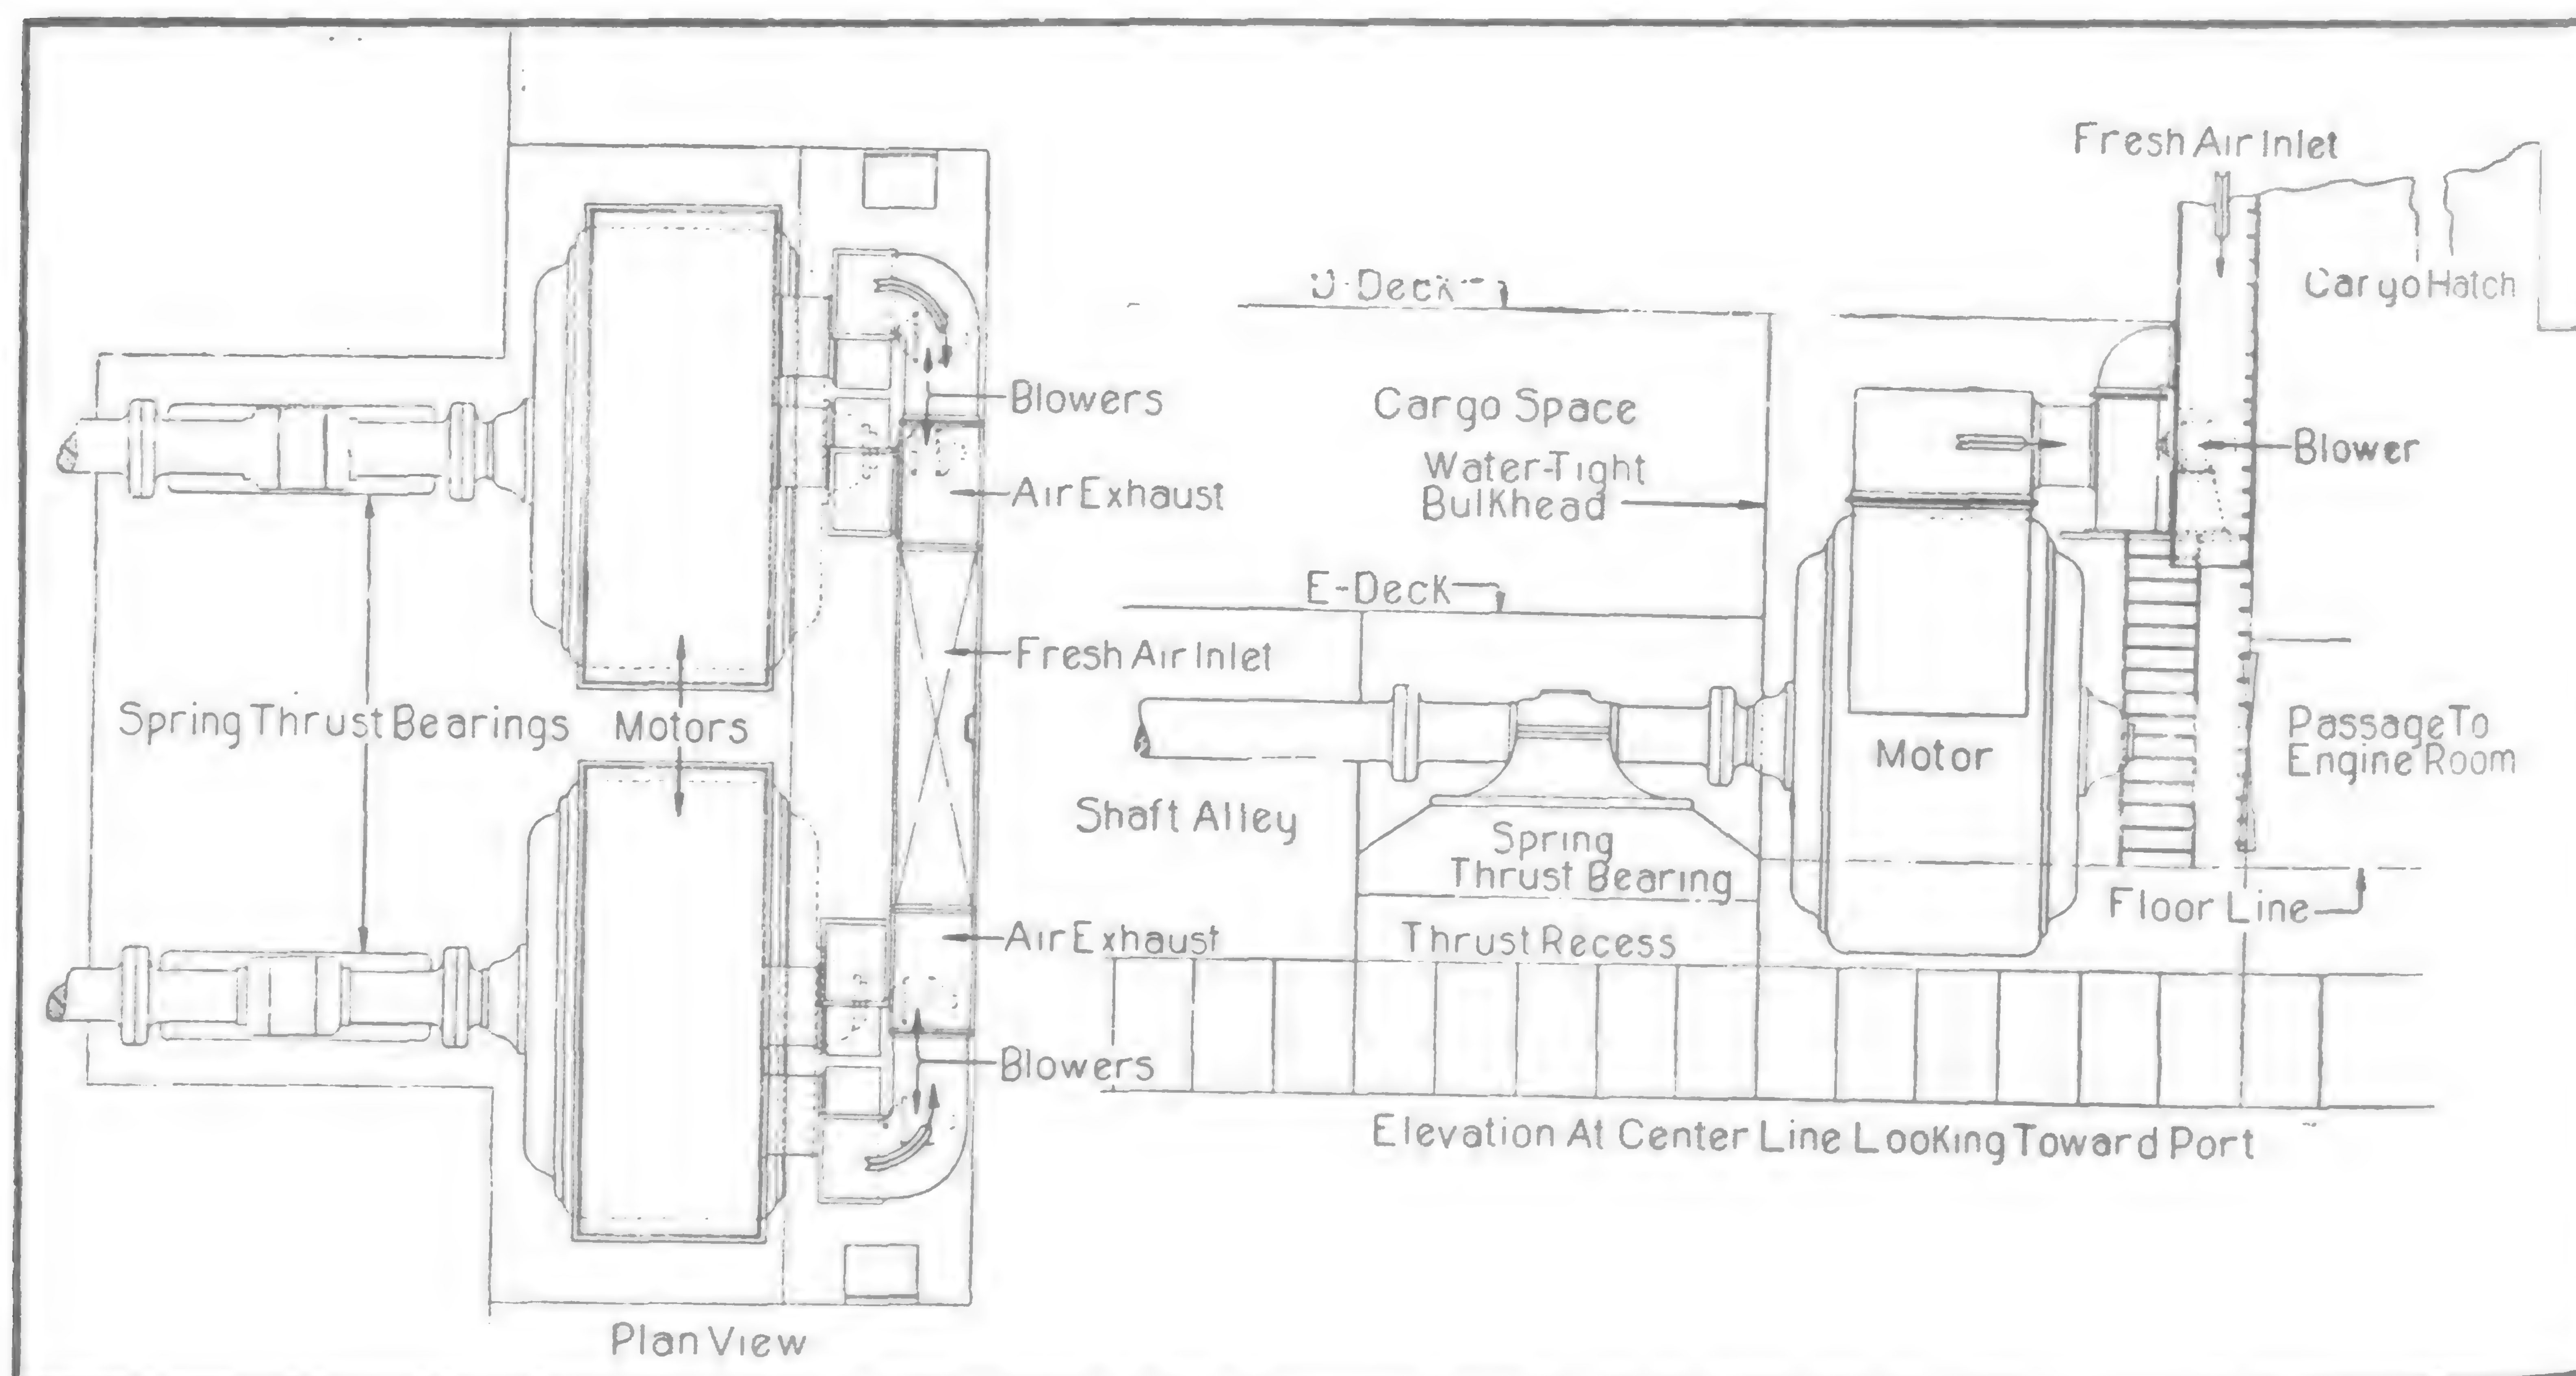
Diagram Showing Arrangement of Motor Room Aft for 30,000 Shaft H.P. Twin Screw Vessel
